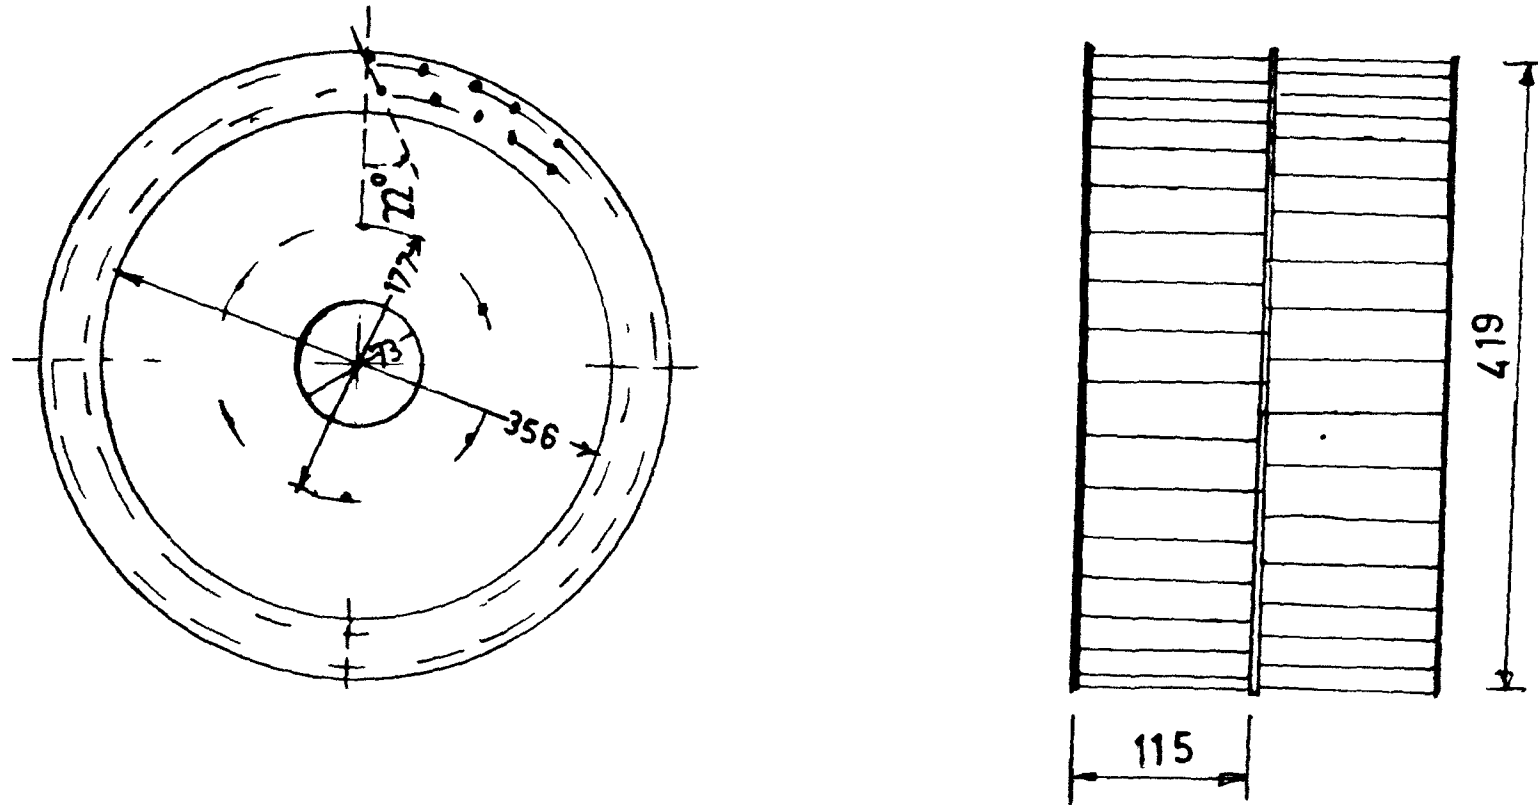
SCHEMATIC VIEW OF IMPELLER OF BLOWER 'U'
